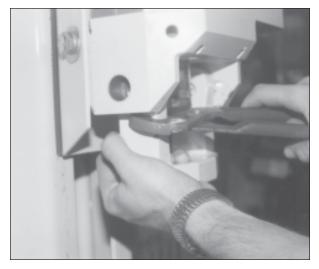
Push latch towards bottom plate while holding detent ball inside of latch.
